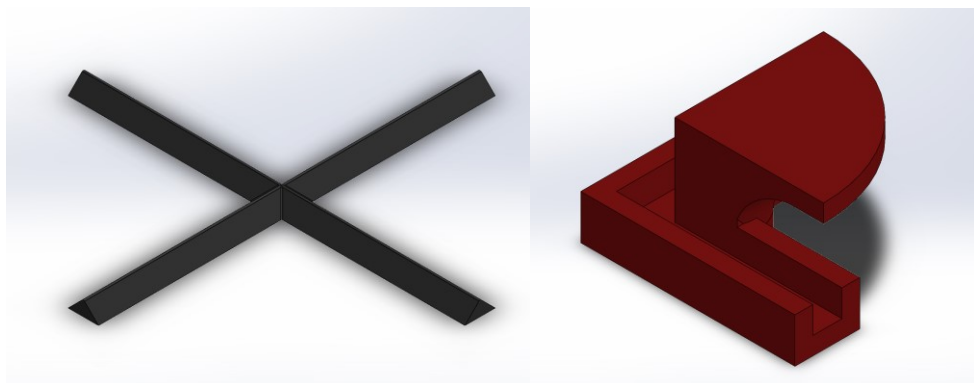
Crossbeams (Left) Two are required for complete assembly. Corner joints (Right) eight are required for complete assembly
